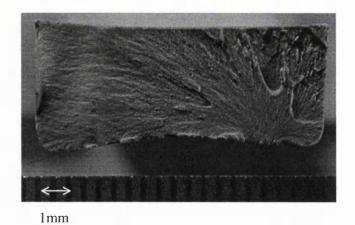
Impact fracture of RP, which is typical for both tensile and impact
